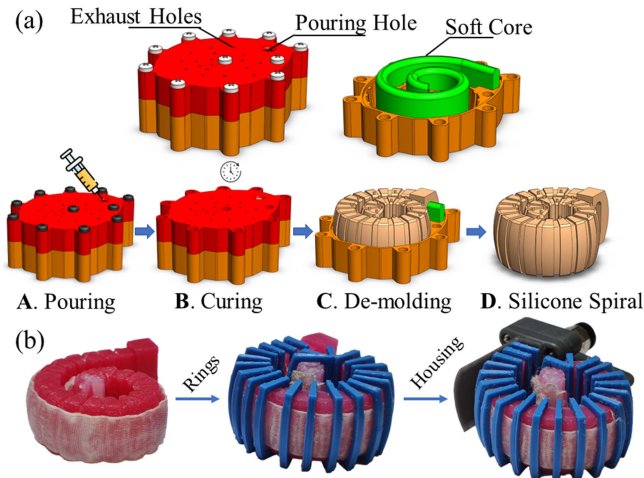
(a) Silicone molding process. (b) Assembly of the SoftER SPA module.
